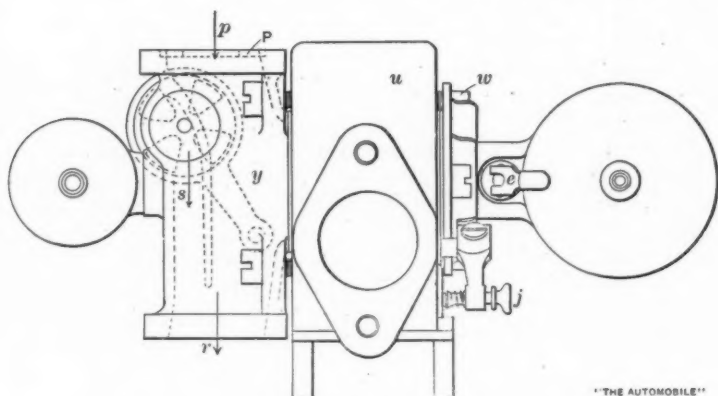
PLAN AND TOP VIEW OF CARBURETER.
